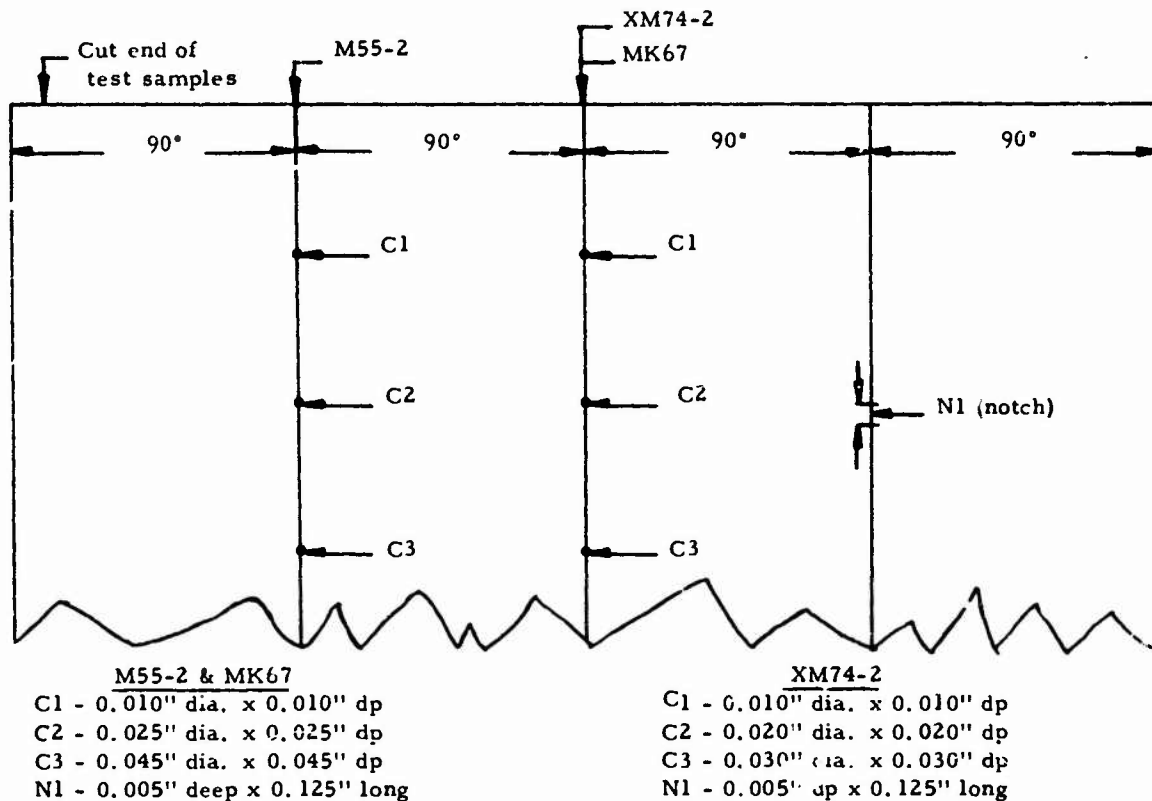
Reference Hole Placement and Dimensions for Tubing Samples M55-2, XM74-2, and MK67
